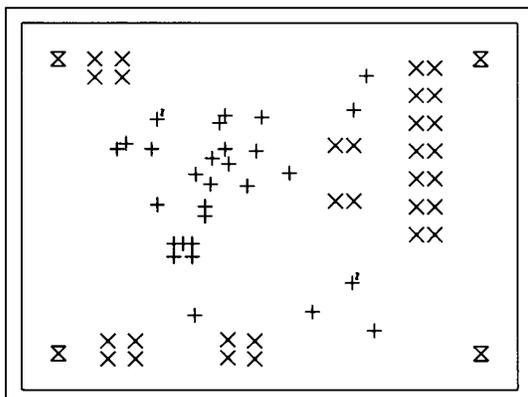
MAX624 PC Board Drill and Mechanical Guide
